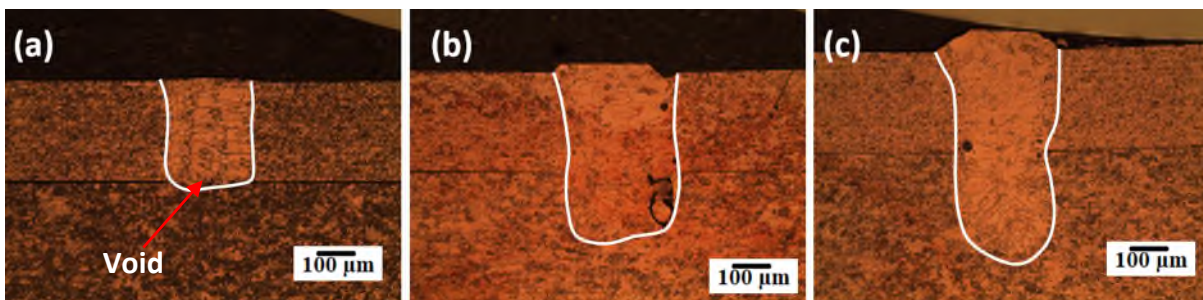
Macro view of the laser-welded Cu tab to Cu busbar at (a) under-weld, P= 525 W (b) good weld, P= 975 W and (c) over-weld, P= 1275 W
